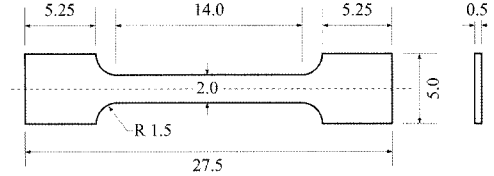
Dimensions of the tensile specimens(the scale in mm).
